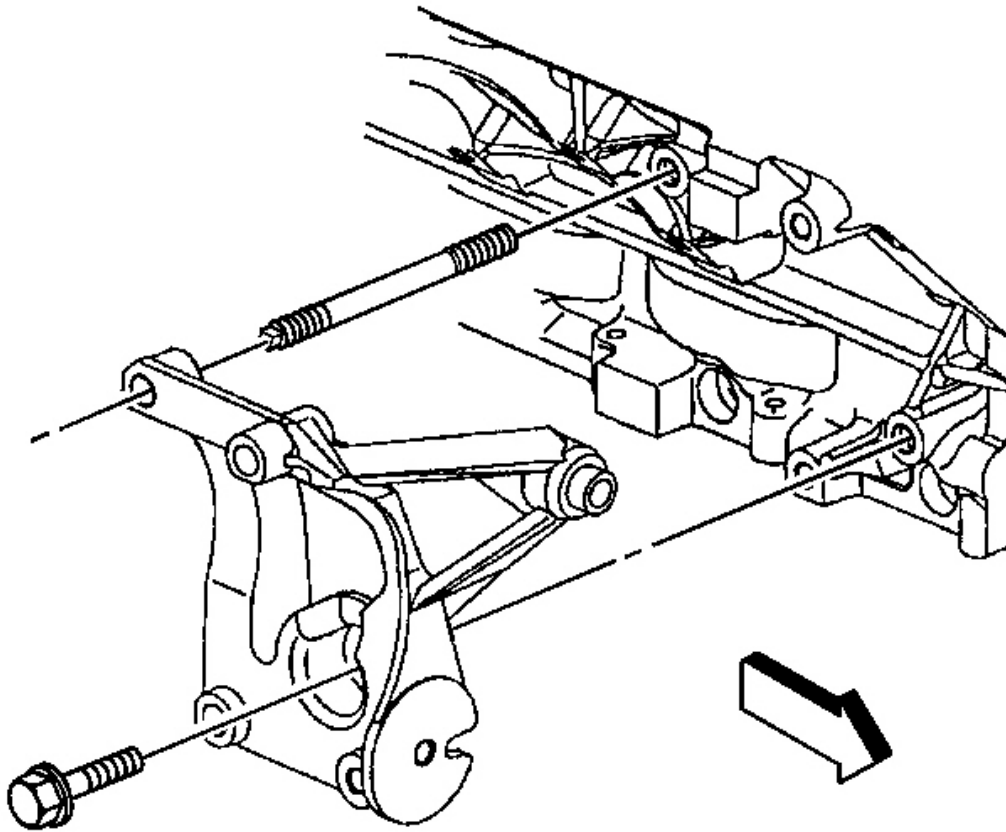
Engine Block Compressor Mounting Bracket & Stud
